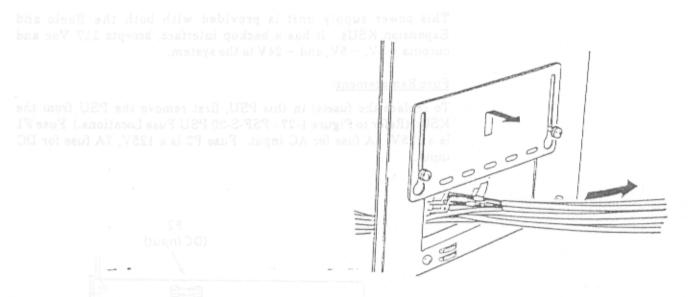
Removing the Slide Bracket on the Basic KSU
